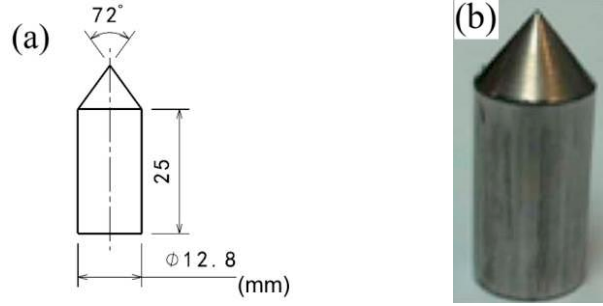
Geometry and dimensions of the conical projectile used in perforation tests: (a) schematic illustration and (b) actual shape.
